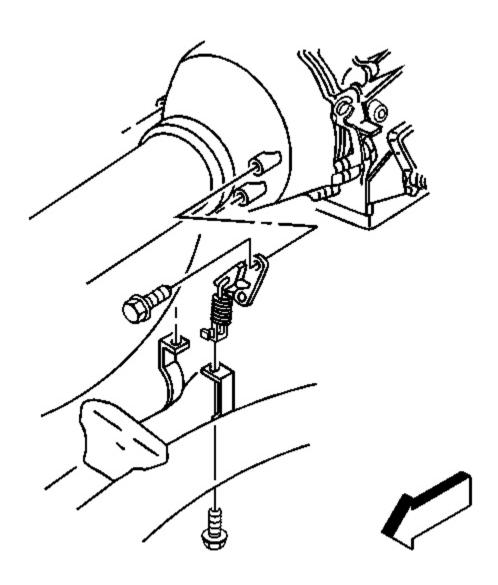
Exhaust Pipe Hanger Lower & Bolts Courtesy of GENERAL MOTORS CORP.
